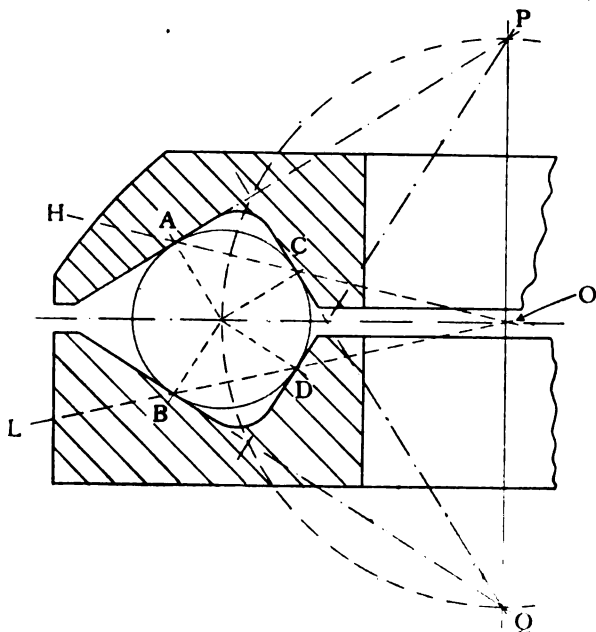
METHOD OF SETTING-OUT A V-THRUST BALL RACE.
